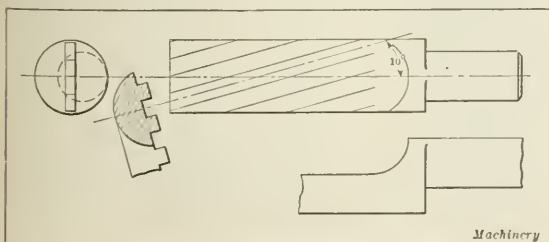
Detail of Feed Bar D, showing Rack Teeth that engage with C to feed Recessing Tool
